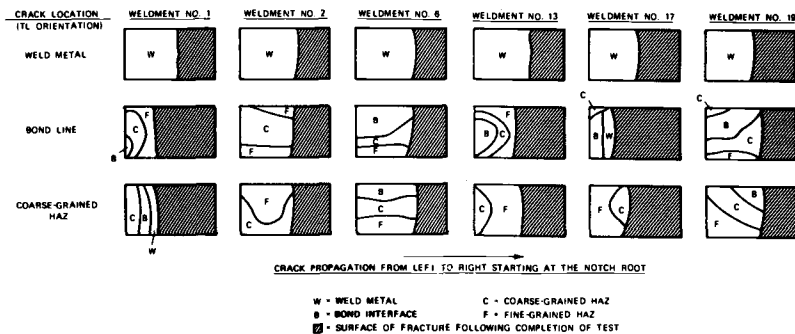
Demarcation of weld and HAZ regions traversed by the fatigue crack in 1-in.-thick (35.4-mm) weldments.
